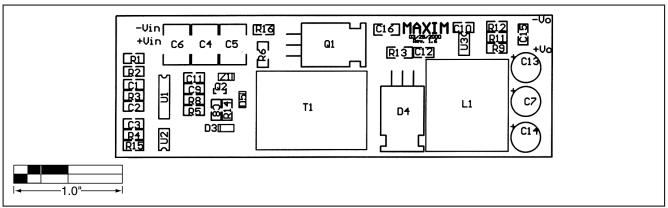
MAX5003-50W EV Kit Component Placement Guide—Component Side. Note: Q1 and D4 are placed on the bottom side where their metal tabs are exposed to heatsink plate.
